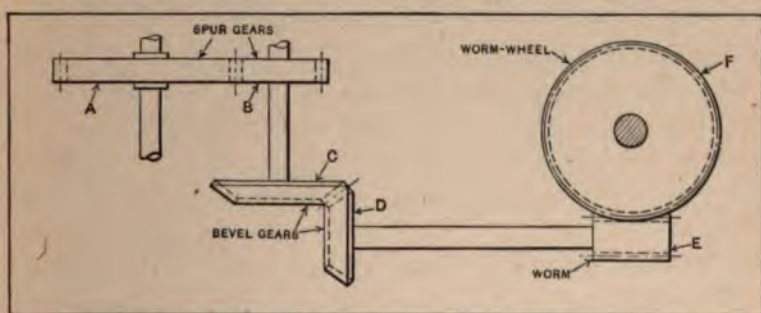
Combination of Spur, Bevel, and Worm Gearing
